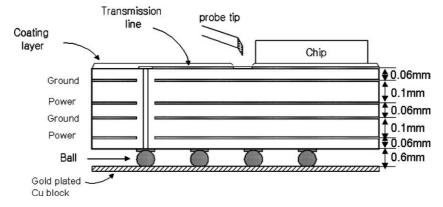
Cross-sectional view of BGA packages electrically analyzed using measurements. The ball side of BGA packages is shorted in this figure. For open load, gold plated Cu block is excluded.
